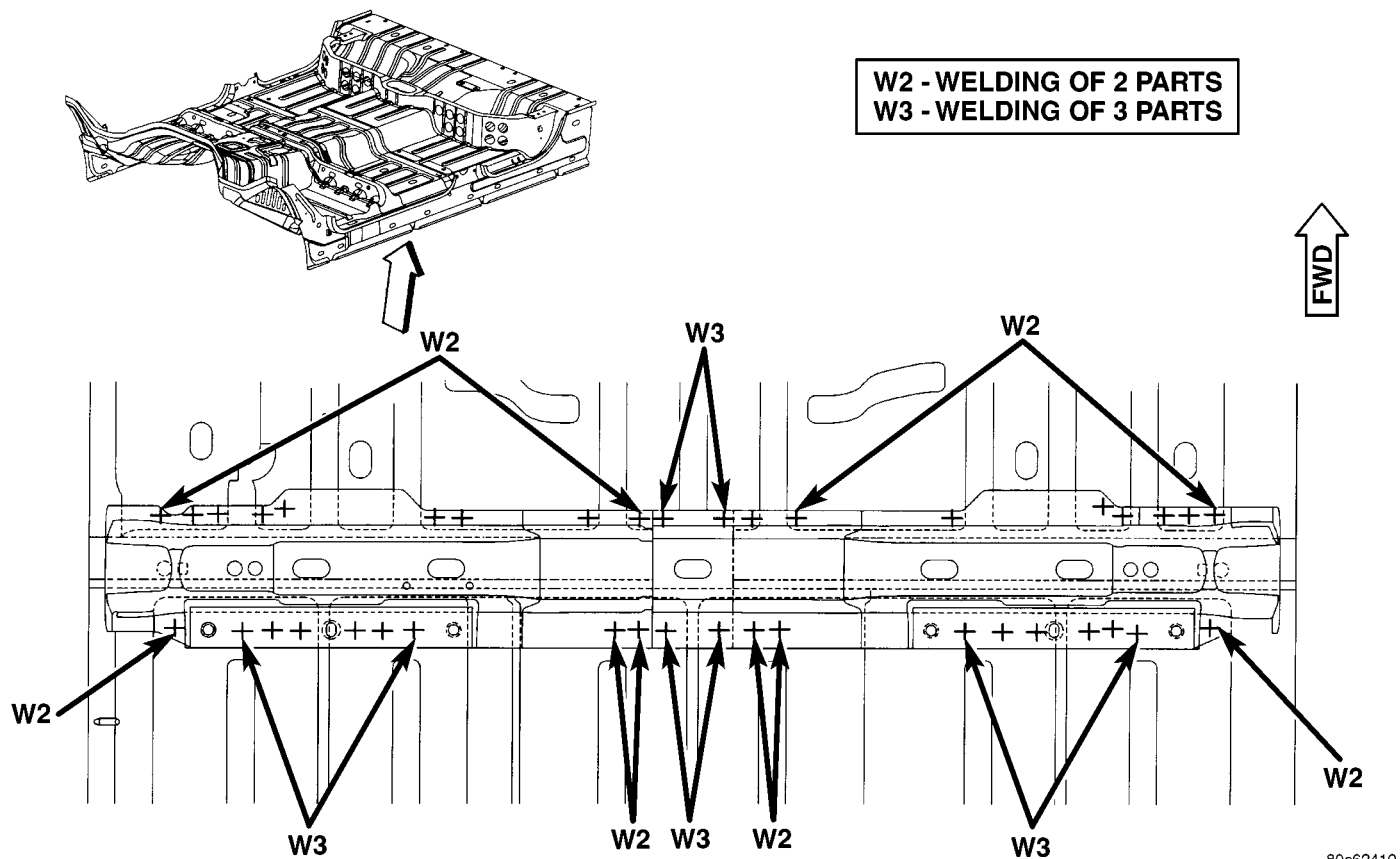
RIGHT REAR FRONT SEAT MOUNTING CROSSMEMBER - QUAD CAB
